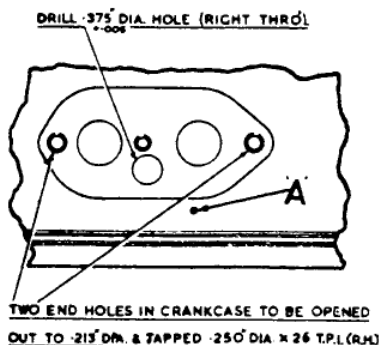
SCRAP VIEW SHOWING DRILLING ETC. OF CRANKCASE OIL RELIEF VALVE FACING.
